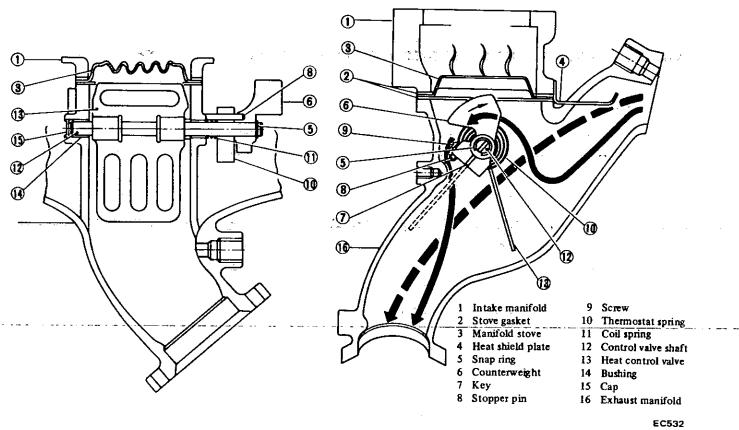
Early Fuel Evaporative system (E.F.E.)
